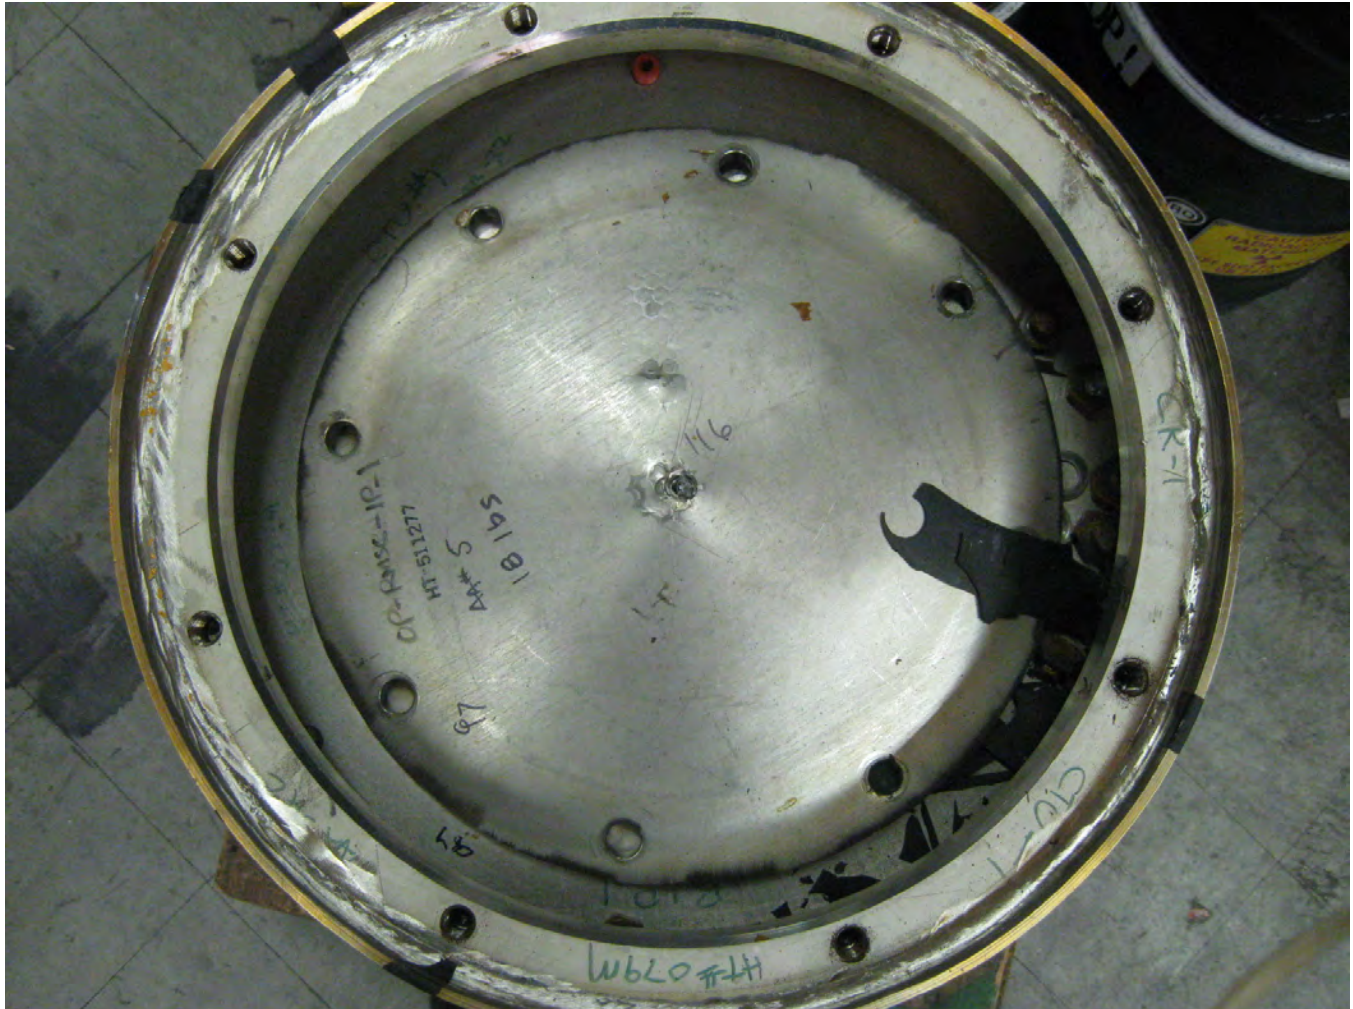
CTU-1 Post-Test Disassembly: View of Inner Lid w/ Failed Hex Bolts
